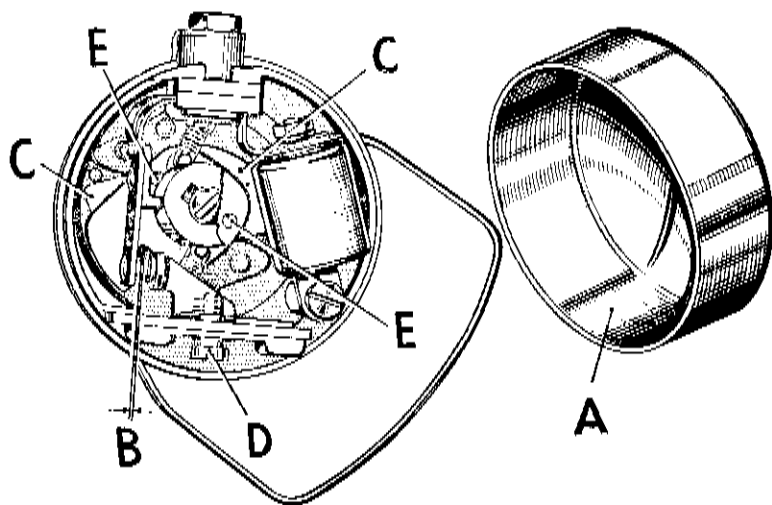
A. Contact Breaker and Auto Advance Mechanism.
